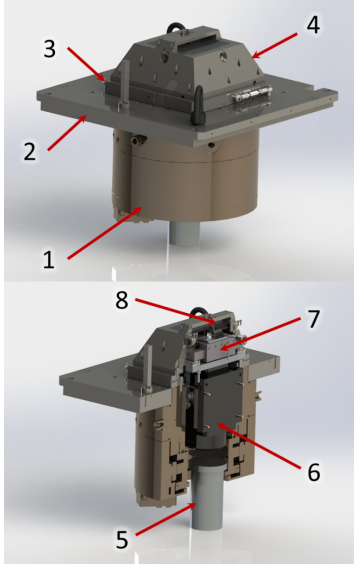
CAD model of the upgraded Velociprobe sample stack, both whole and a cutaway. The components are 1) air-bearing spindle, 2) spindle mount (and sample coarse X), 3) sample stack mount, 4) metrology frame, 5) slip ring, 6) air-bearing vertical stage, 7) air-bearing horizontal stage, and 8) interferometer target and sample. Parts 2, 3, and 4 are all made of Invar.
